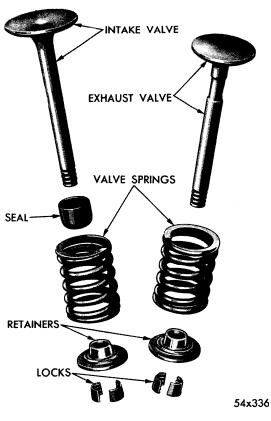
Valves, Springs, Seal and Retainer (Disassembled View)
